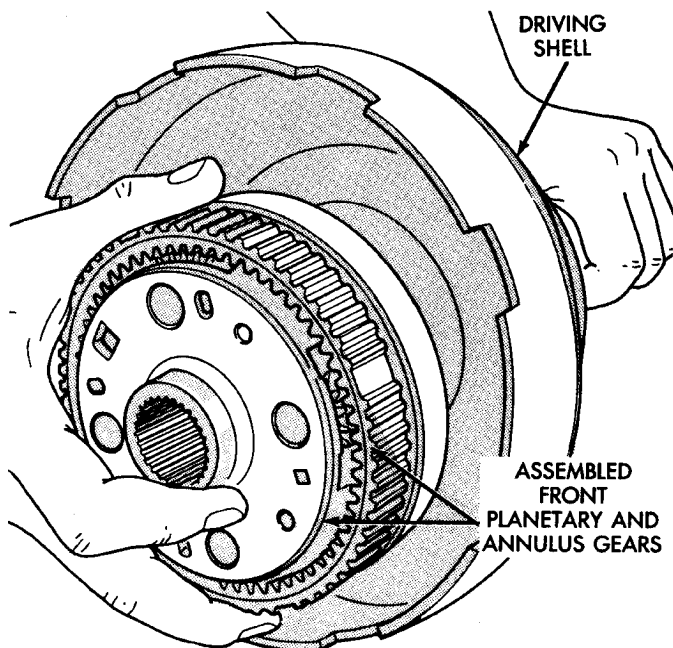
Installing Front Planetary And Annulus Gear Assembly
